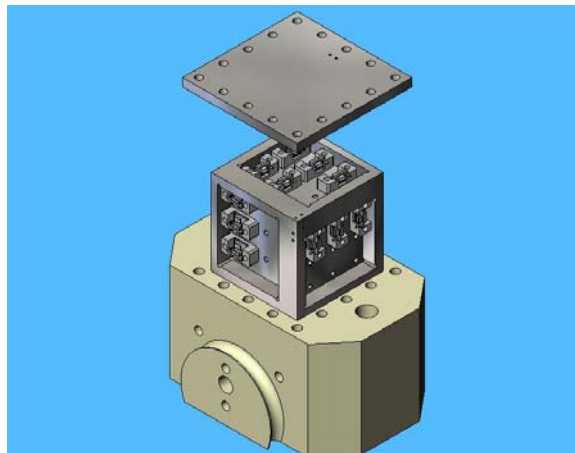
View of the MEMS unit fixture showing drop table carriage, fixture block, and clamp plate.
